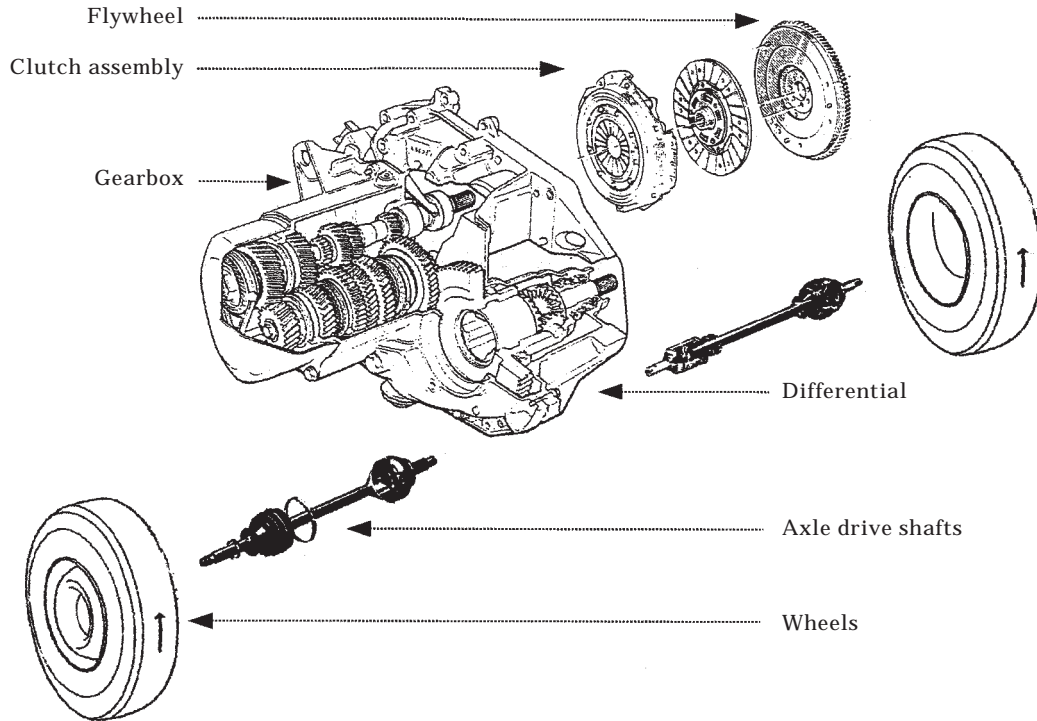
Front-engine front-wheel-drive vehicle driveline.
